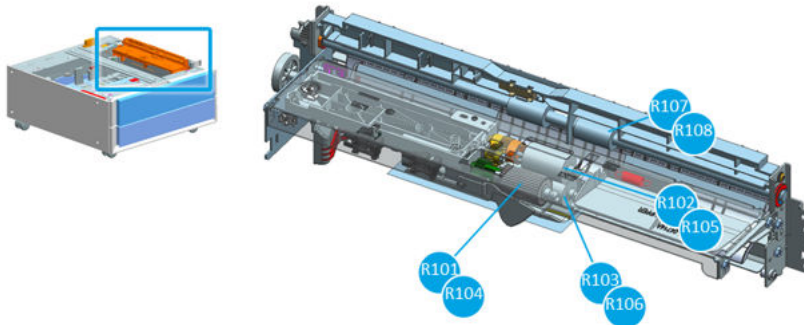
Detail view of DCF(Tray 4, 5) roller
